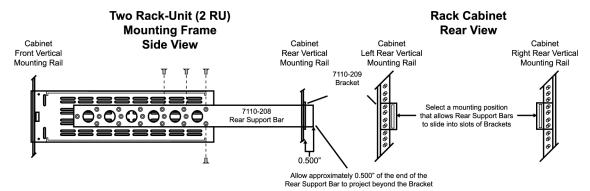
FSB-8321 — Frame Support Bracket Installation
